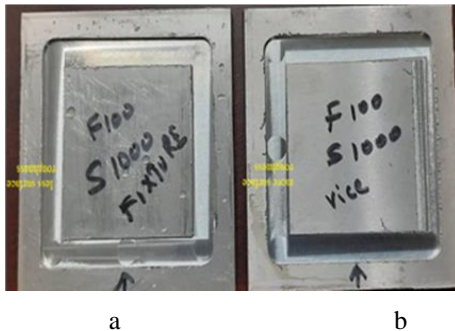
Aluminium plate – machining: a) before; b) after the use of support heads
